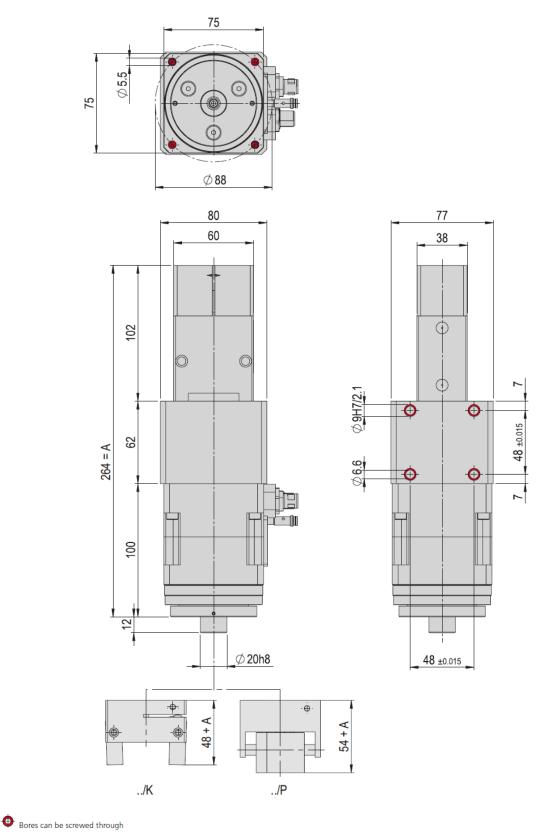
Dimensional drawing of module GMQ 32/RE-75
